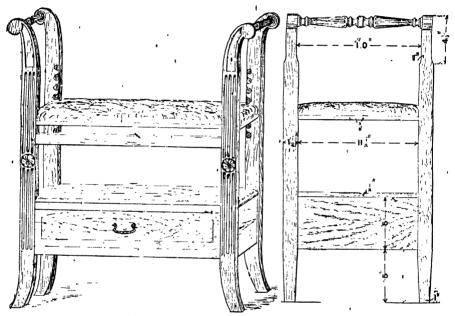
General View of Music Stool with Shaped Posts and Rising Seat.
